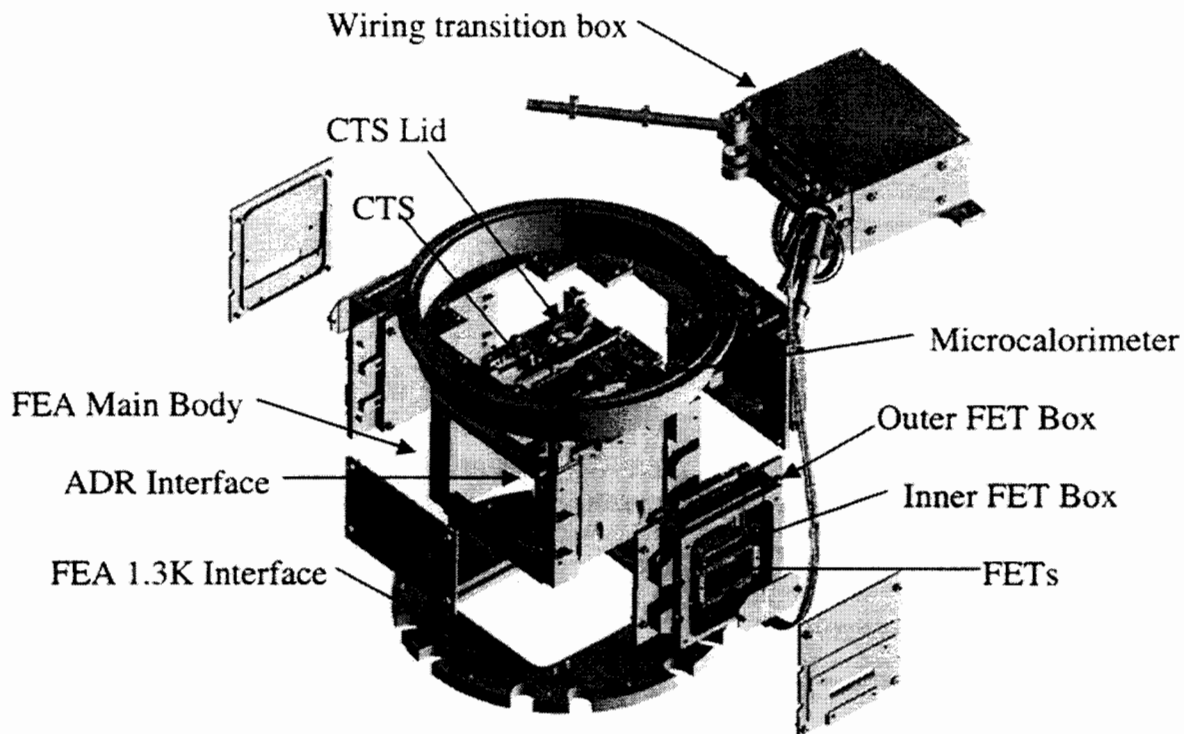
Exploded view of the XRS Front End Assembly (FEA).
